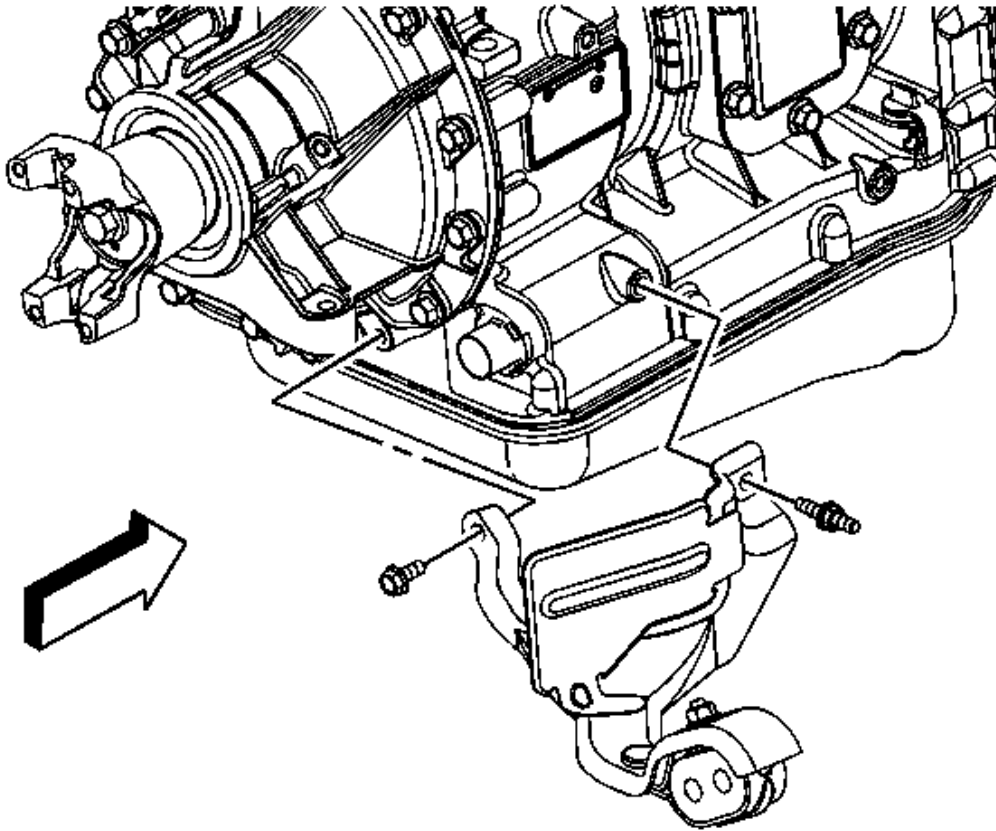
View Of RPO MW7 Exhaust Pipe Hanger Bracket, Bolts & Studs
